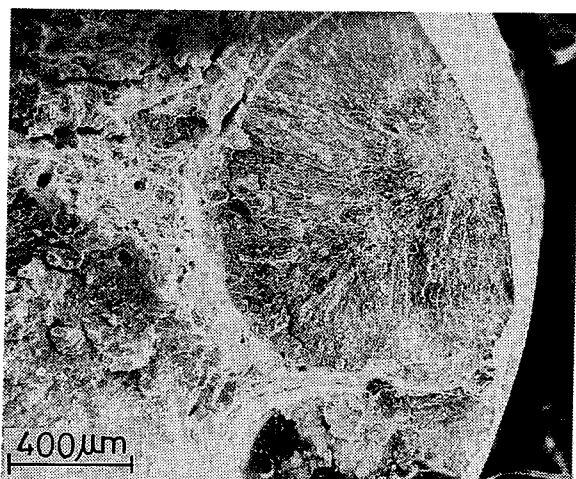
Fracture surface of SSRT of base metal.
